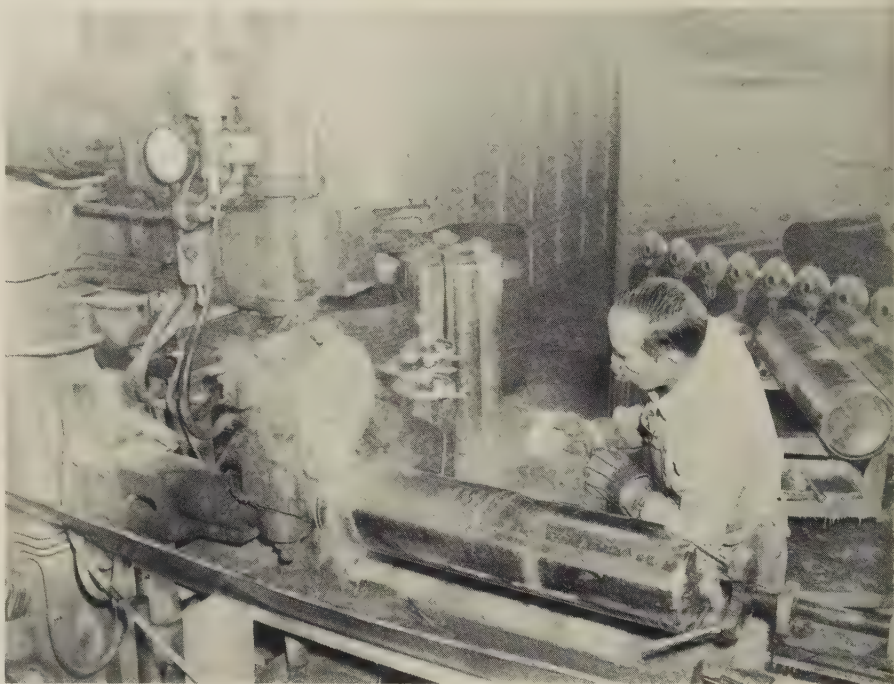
Sciaky Seam Welder joins the bottom to the shell.
